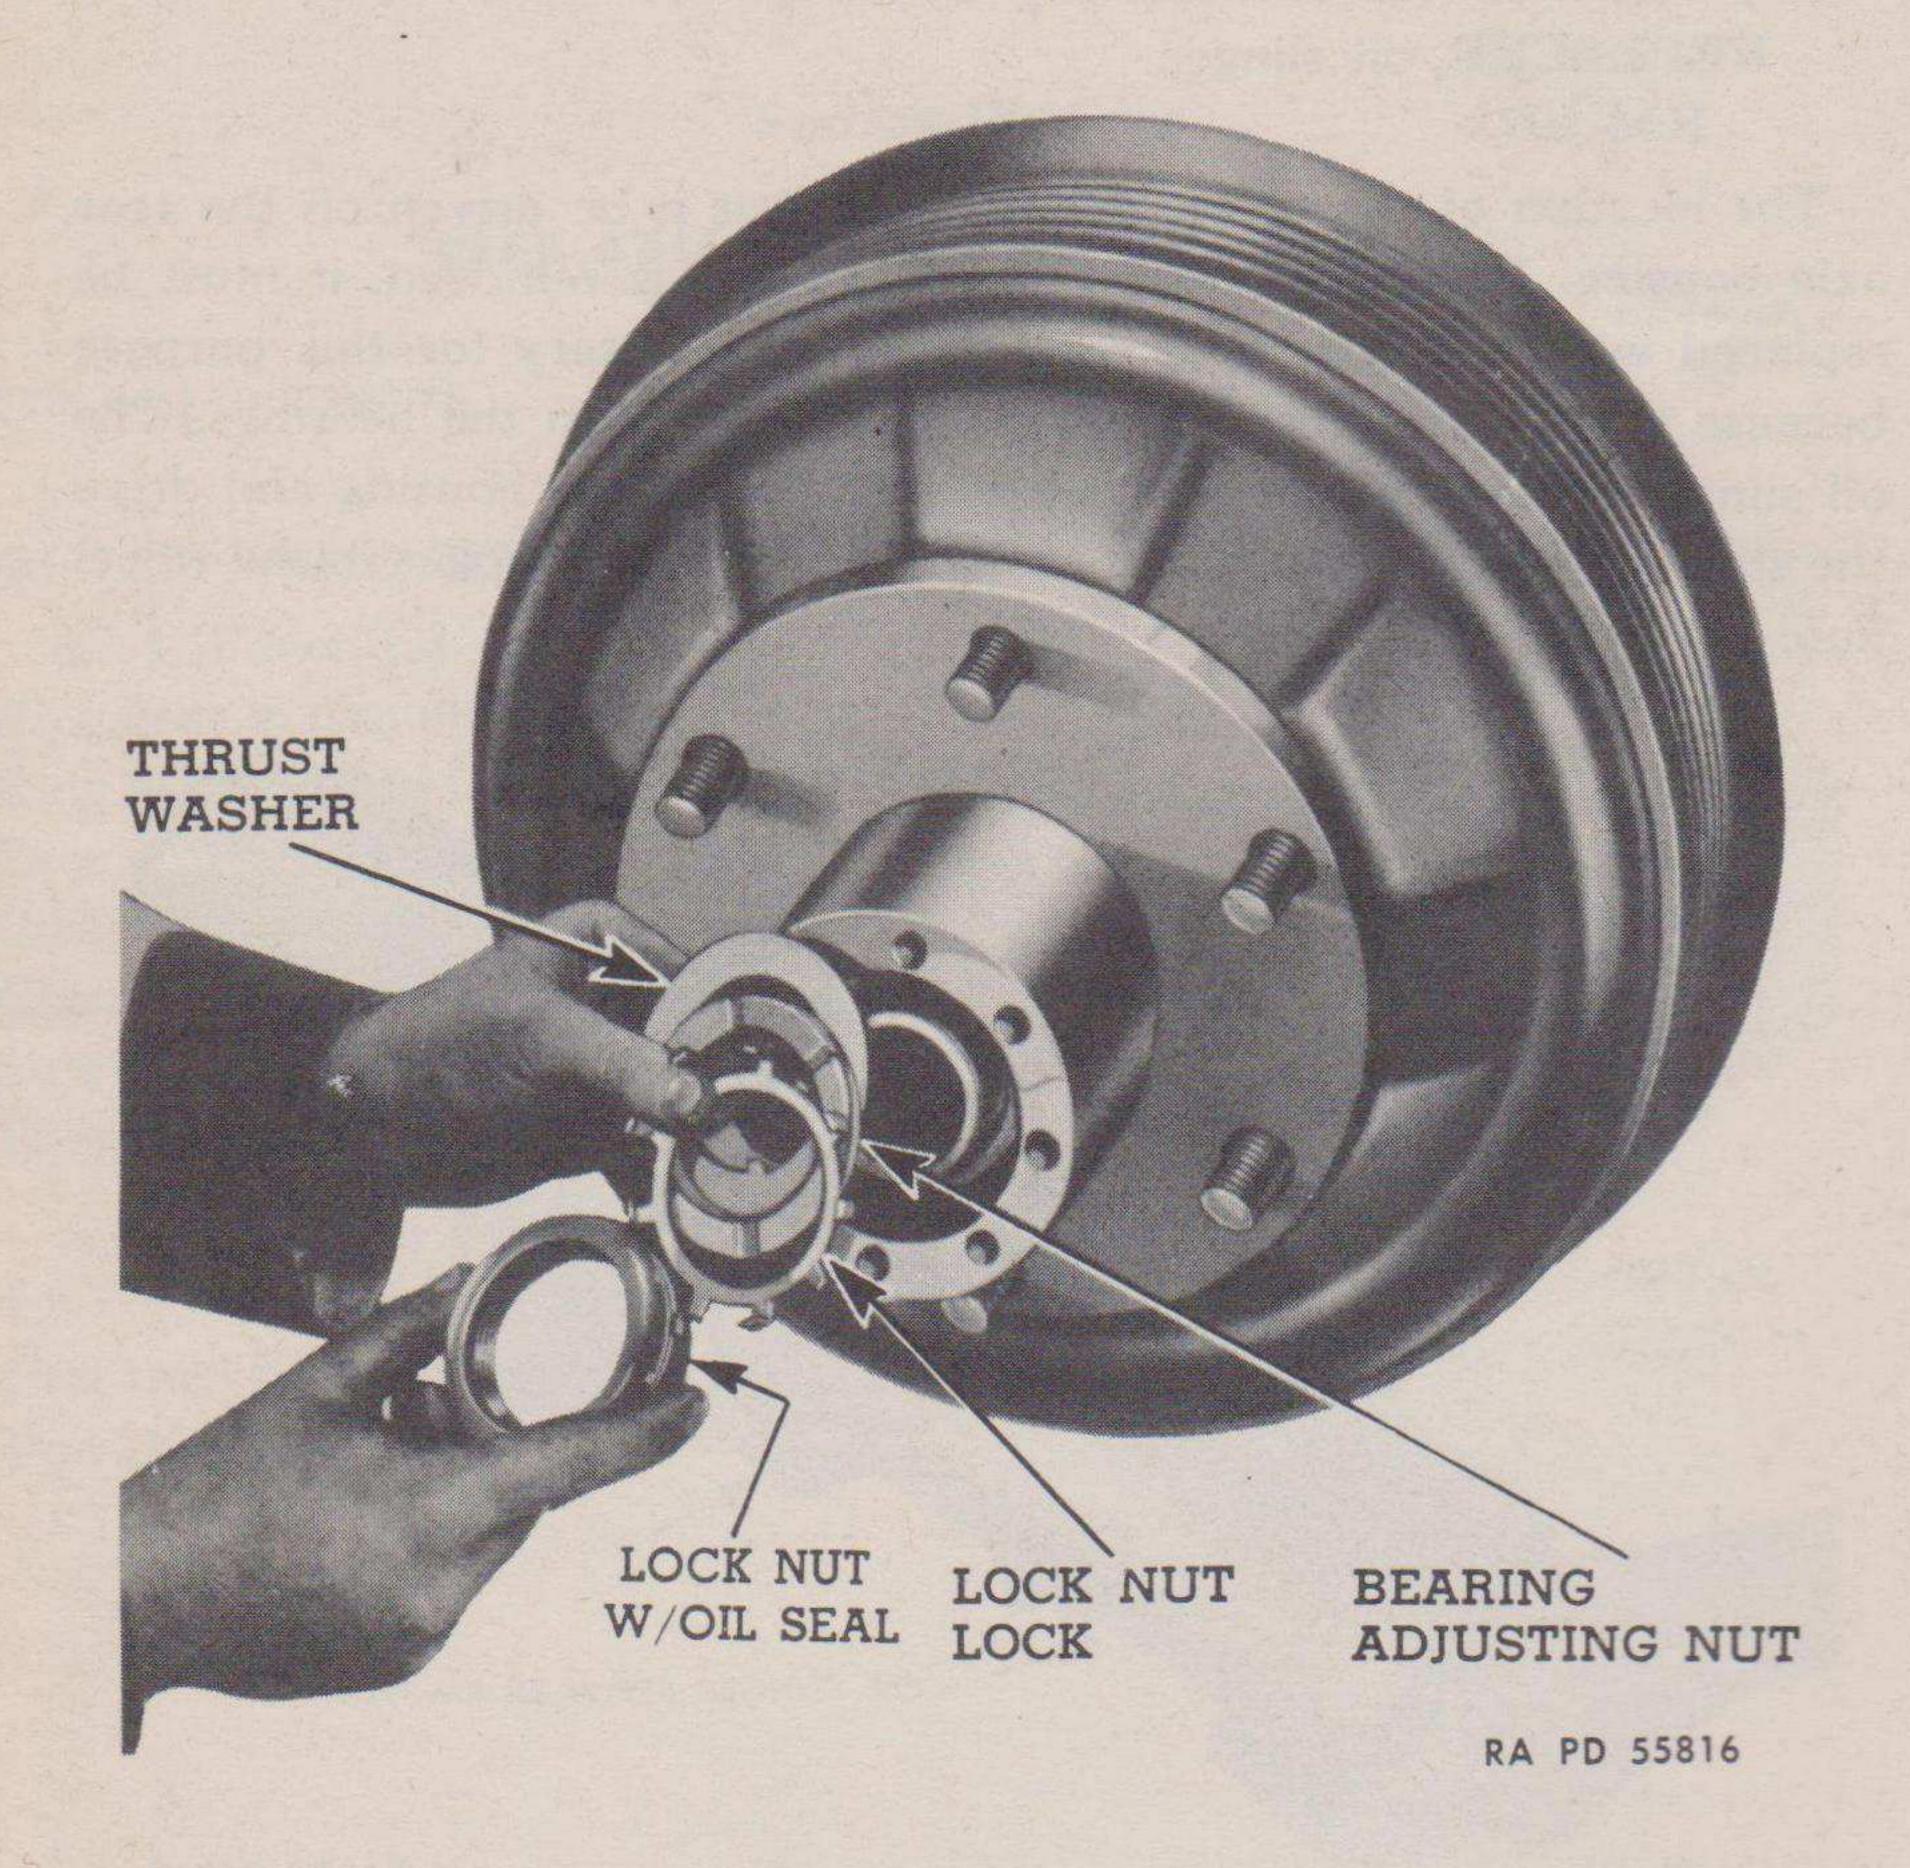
Installing Wheel Bearing Adjusting Nut Parts
